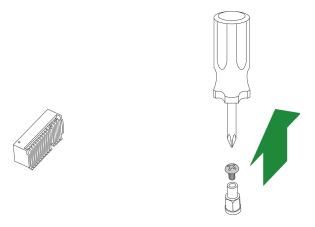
Removing the Screw on the Pre-Installed Standoff
